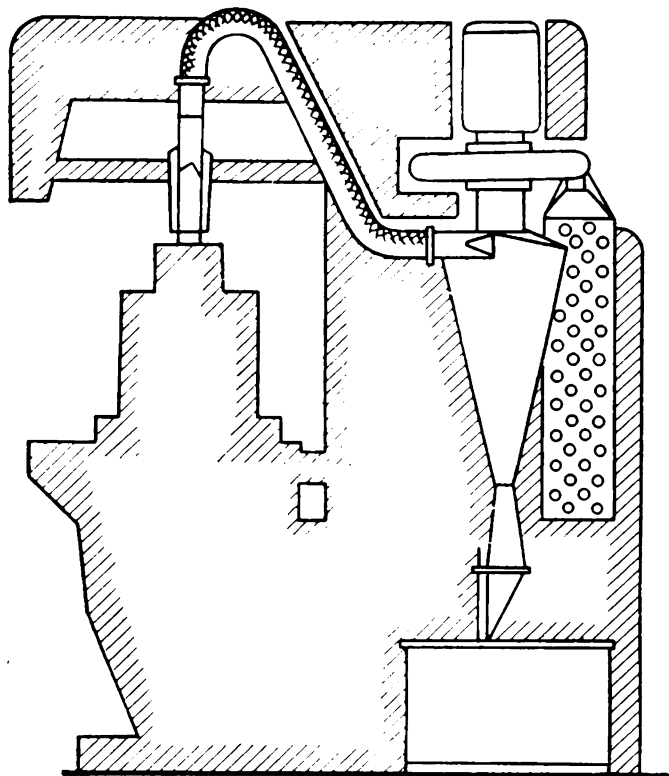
Chip and dust removal from the zone of cutting in a milling machine.
